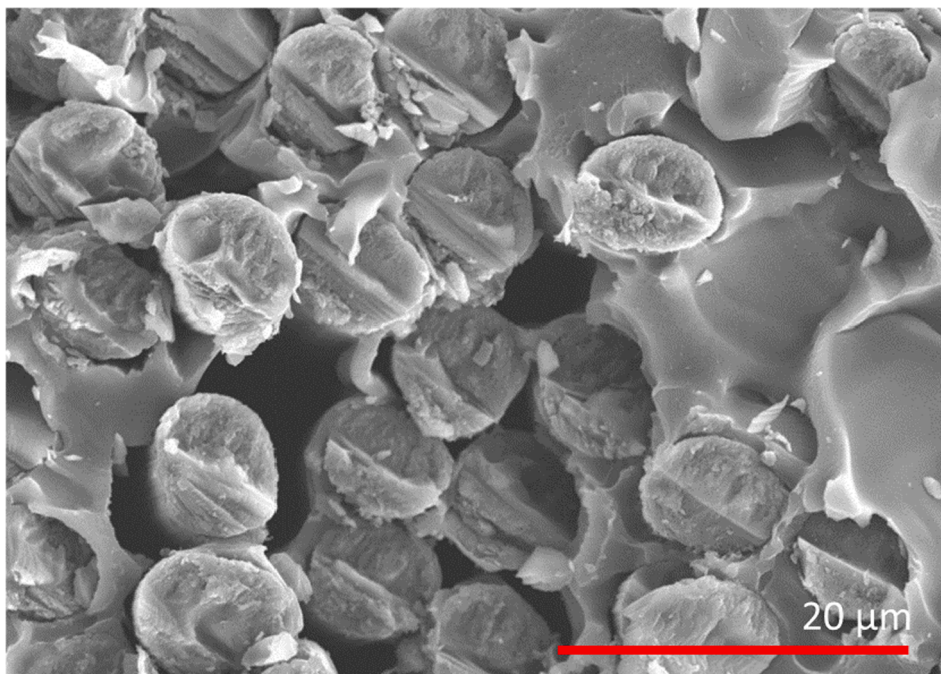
SEM image showing the fibre in the printed specimen after fracture.
